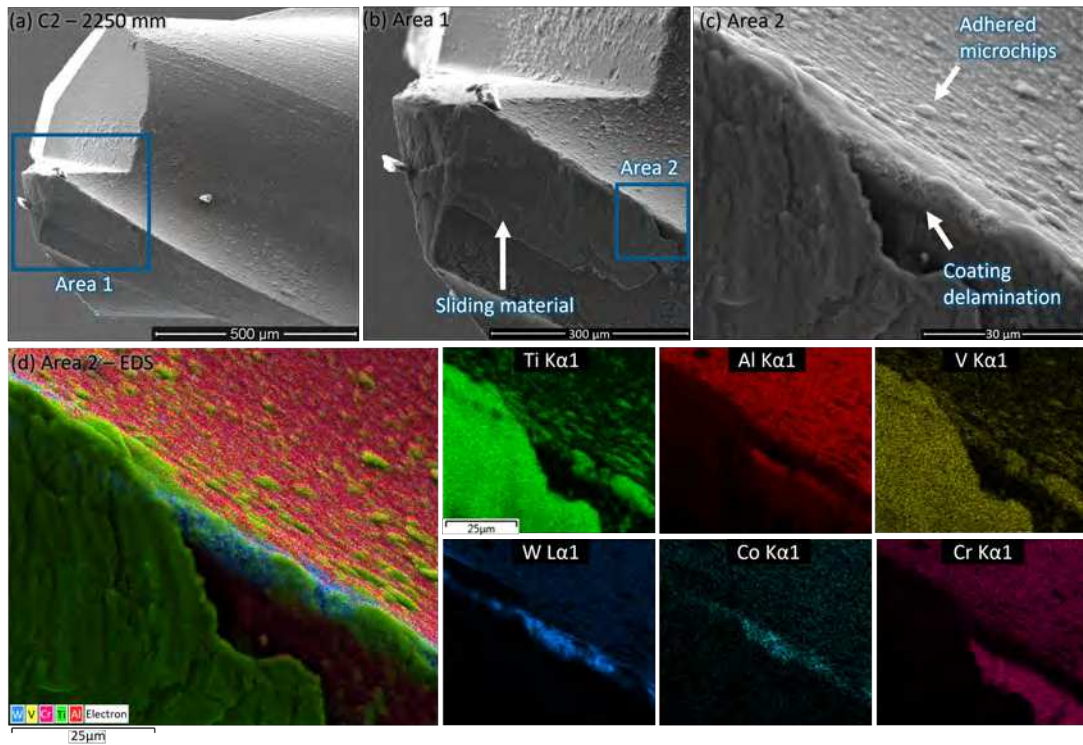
SEM images and EDS analysis of a coated tool tip at the machined length of 2250 mm.
